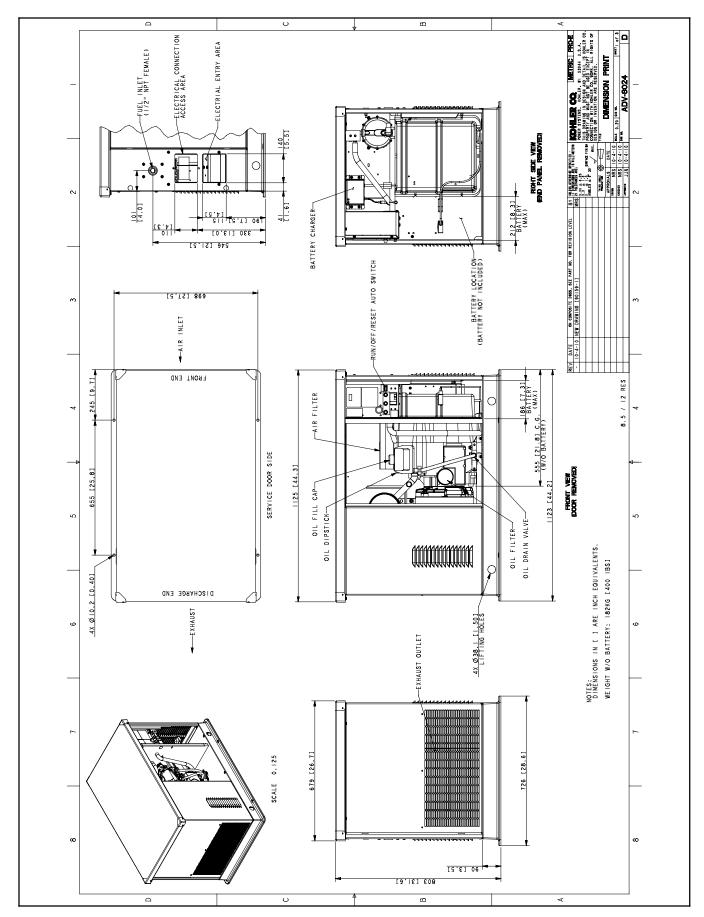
Generator Set Mounting Details and Dimensions, 12RESL/12RESM1 ADV-8024 Sheet 1
